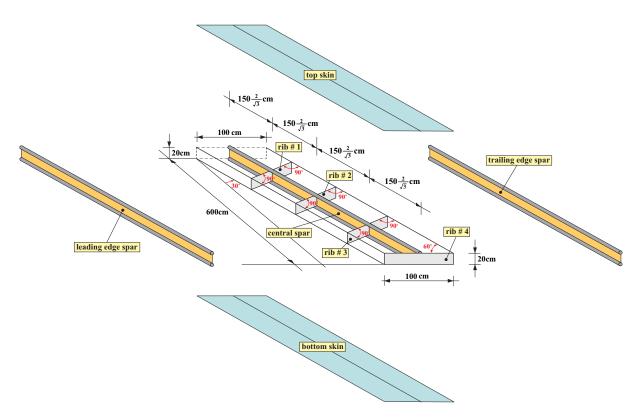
Swept wing (model # 3): exploded view of the wing box structure showing spars, ribs, and top and bottom cover panels.
